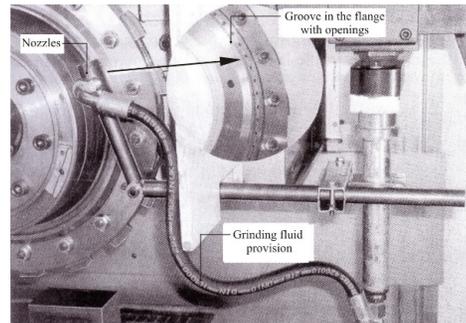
T-Tool-Profil* segmental grinding wheel with grinding fluid nozzle system which injects the grinding fluid to the groove inside the flange and through the openings (located in flange) to the space between abrasive segments [21]
